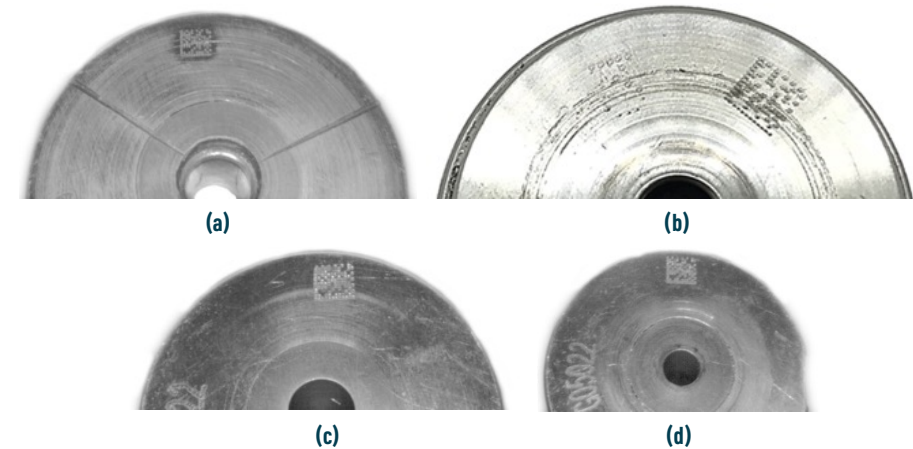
QR code status on the dies used in mass production: (a) Front die produced 25,000 pieces and (b) 90,000 pieces, (c) extrusion die produced 400,000 pieces and (d) 650,000 pieces.
